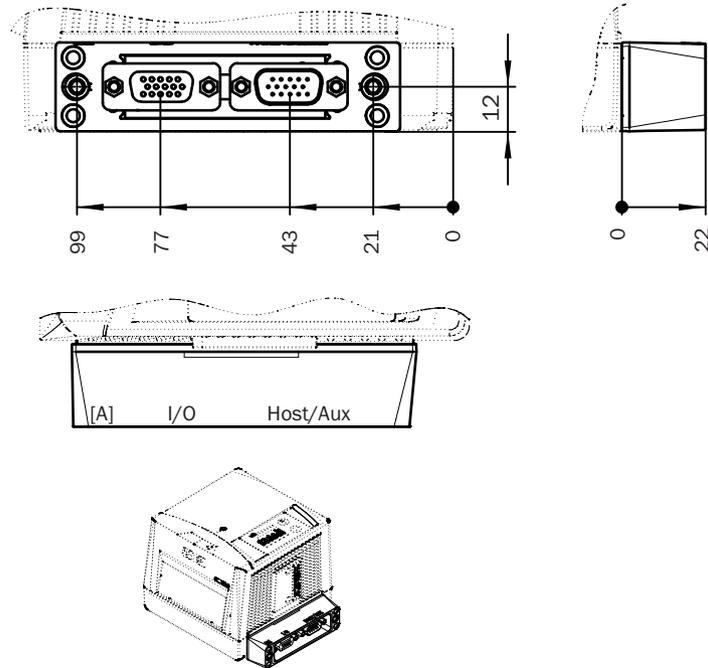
Dimensions of cloning plug A (D-Sub), all dimensions in mm
